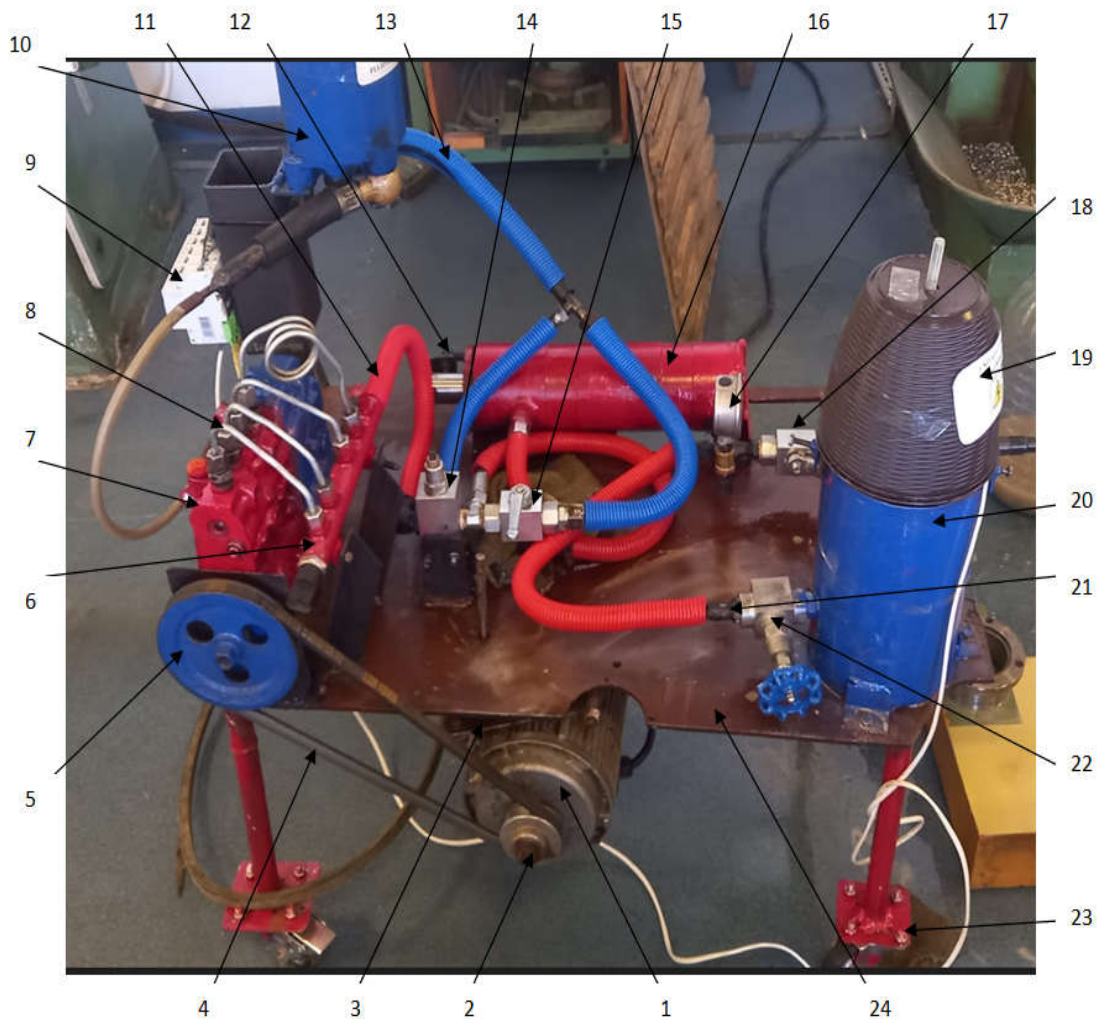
Hydroabrasive processing plant - general view: 1 - electric motor; 2 - driving belt wheel; 3 - engine stretching system; 4 - trapezoidal belt; 5 - driven belt wheel; 6 - pressure accumulator; 7 - injection pump; 8 - high pressure pipe; 9 - control panel; 10 - tank with hydraulic fluid; 11 - high pressure route; 12 - telescopic damper; 13 - low pressure route; 14 - pressure regulation valve; 15 - faucet; 16 - double effect cylinder; 17 - pressure gauge; 18 - faucet; 19 - ultrasonic homogenizer; 20 - tank with abrasive fluid; 21 - check valve; 22 - faucet; 23 - displacement rollers; 24 - table of the installation
